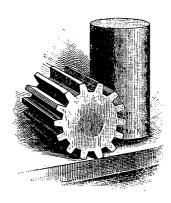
Billet and Hot Pressed Steel Pinion.
